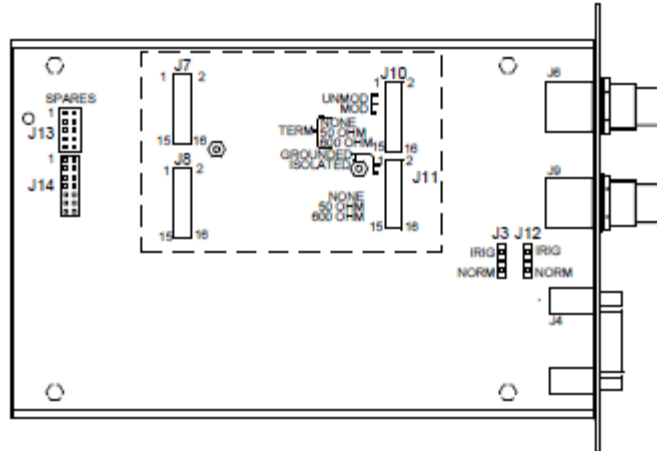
GARD 8000 3U System I/O module, board view showing jumper locations
